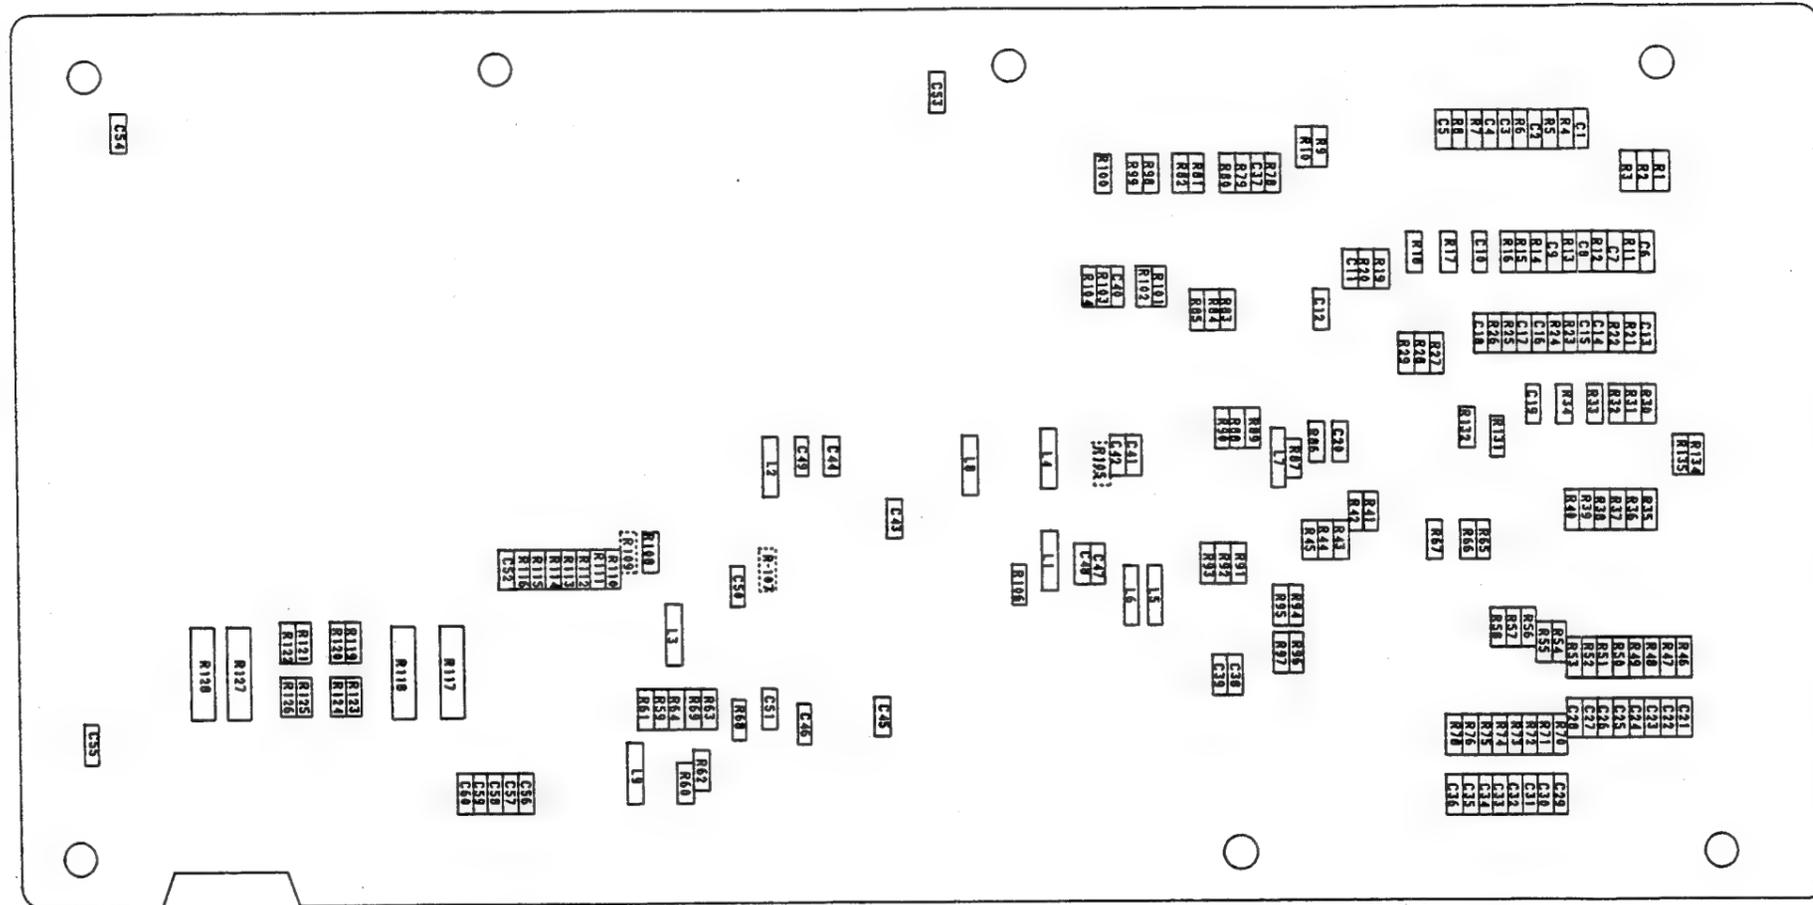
G8ESPA PCB Assembly (Component Side)
